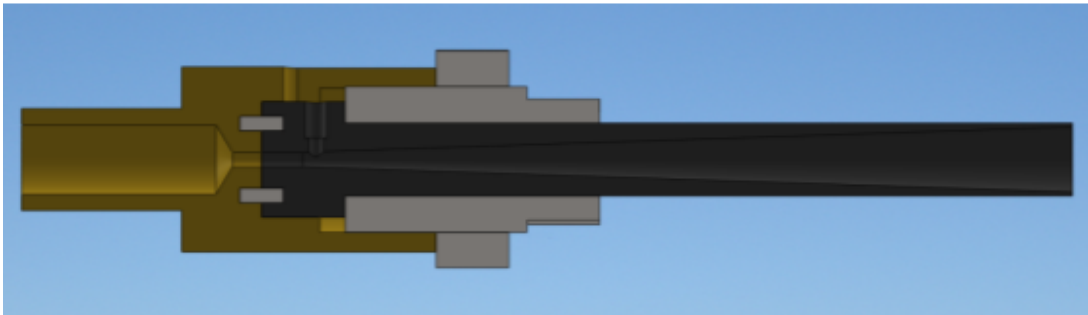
Constant and Ideal Cross Section Nozzle, General View
